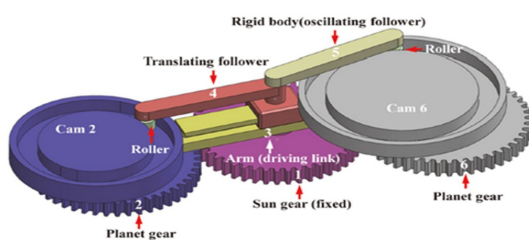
A rigid body guidance planetary gear-cam mechanism [18].
